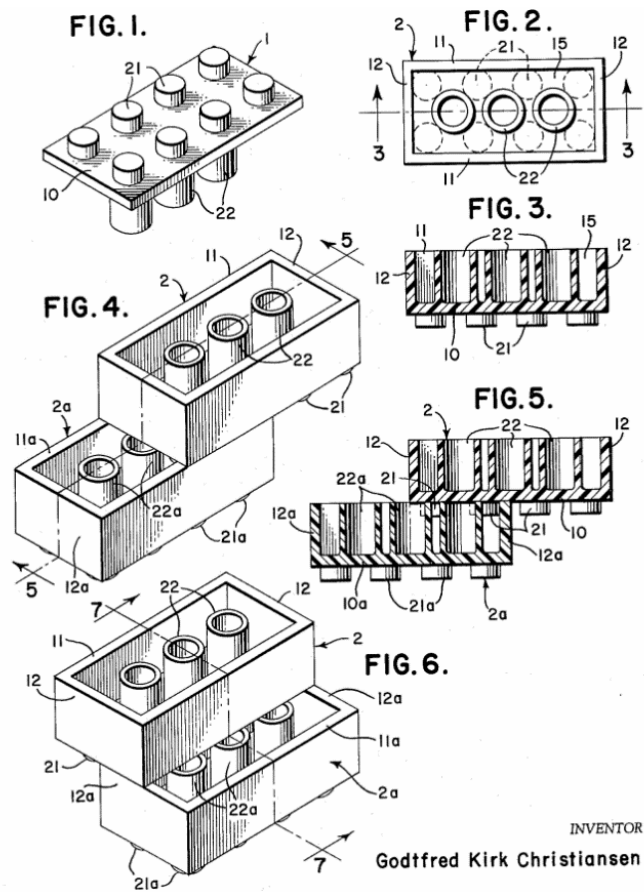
Views of the Assembly of LEGO® Bricks[30]
